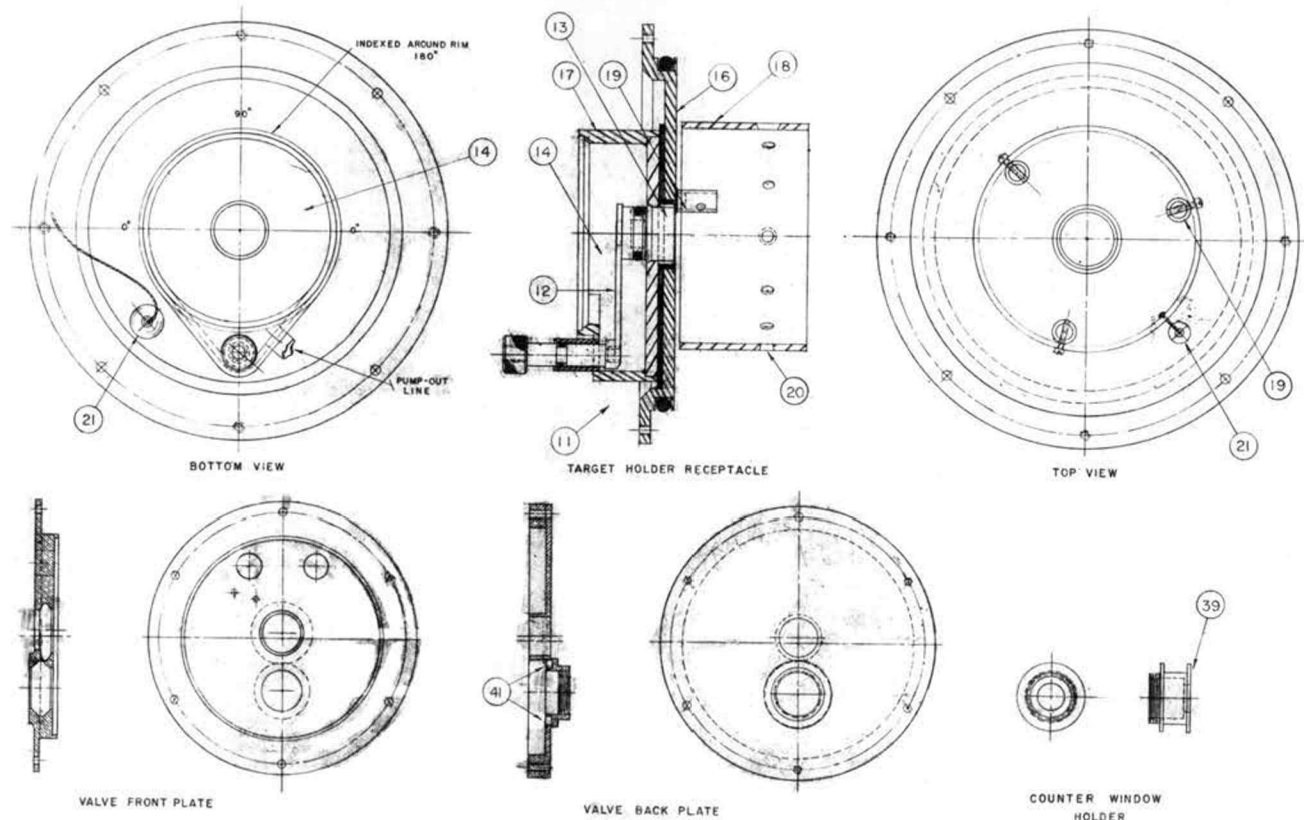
Details of Target Holder Receptacle and Counter Window Valve
